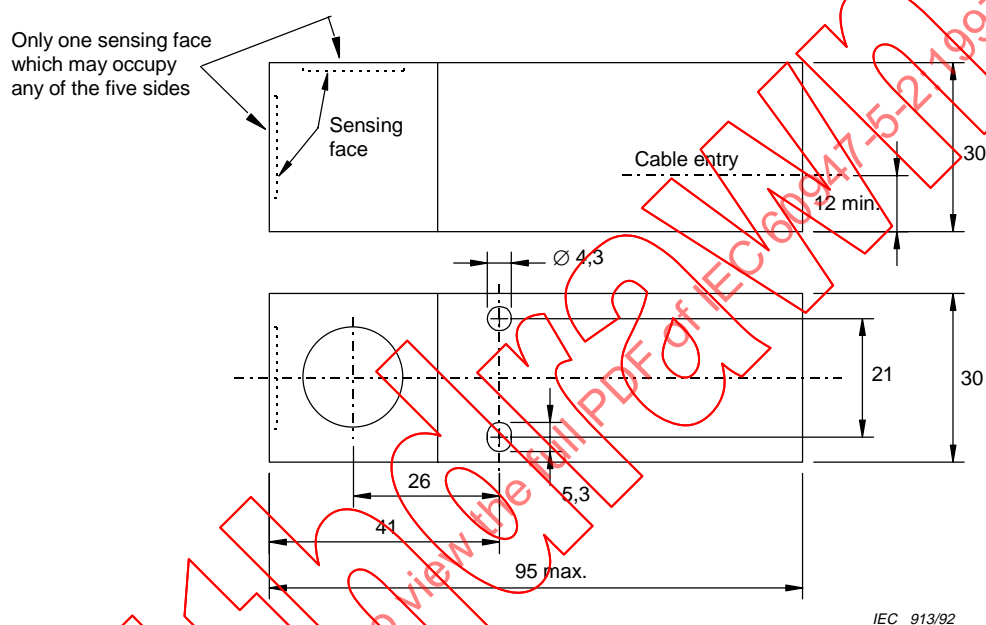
(CC) a – Dimensions, type C30 in millimetres
